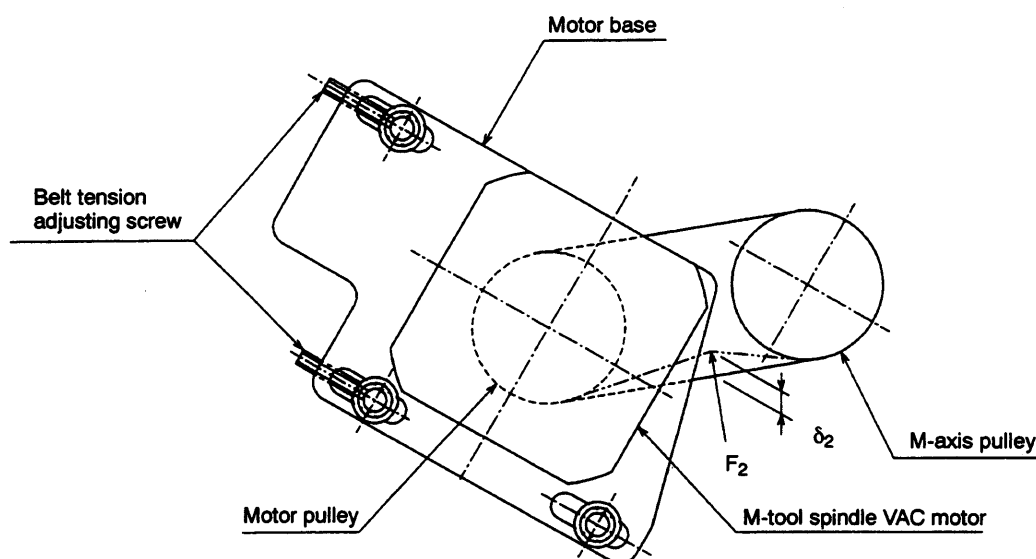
Timing Belt for M-tool Spindle Motor on the Multifunction Turret
